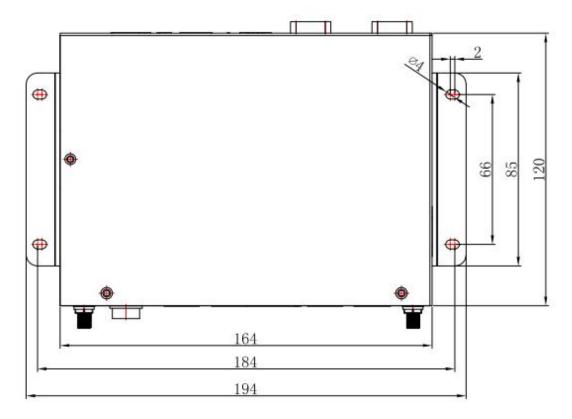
MPC-1911 Mechanical mounting hole position diagram (in mm)
